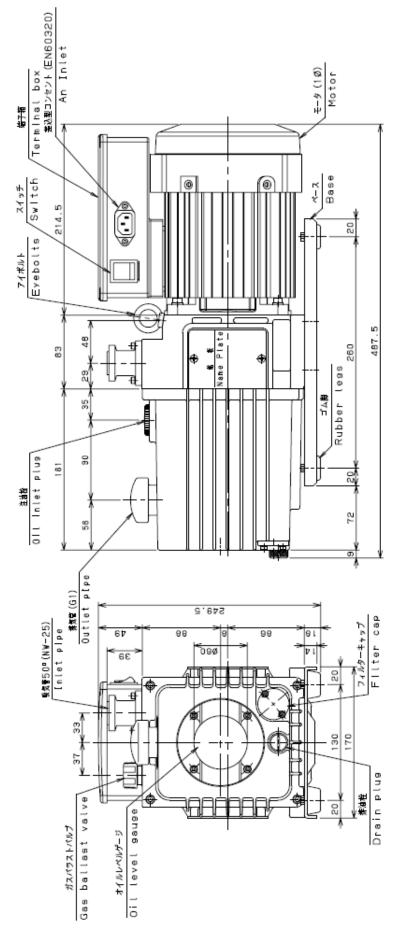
Dimensional drawing of GLD-137CC oil sealed rotary vacuum pump
